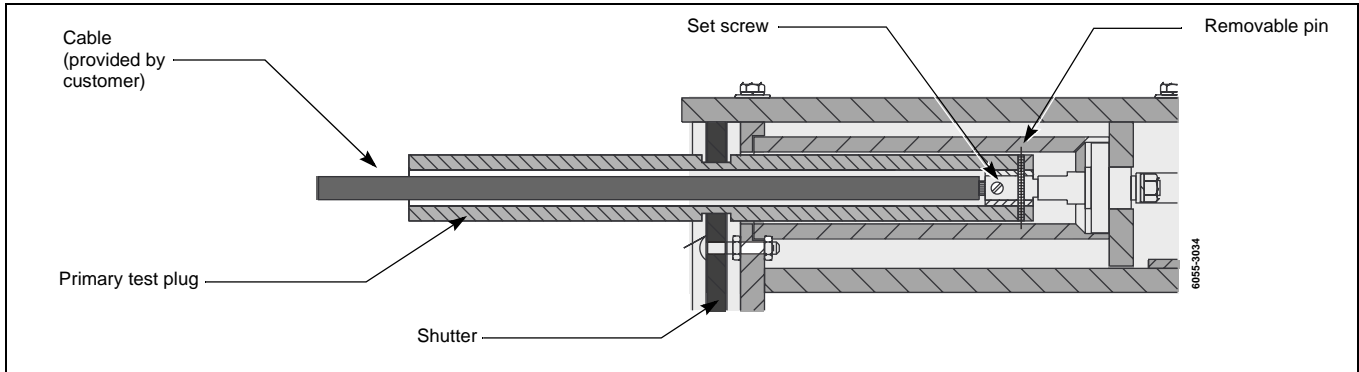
Primary Test Plug Assembly (upper terminal shown—lower terminal is similar)
